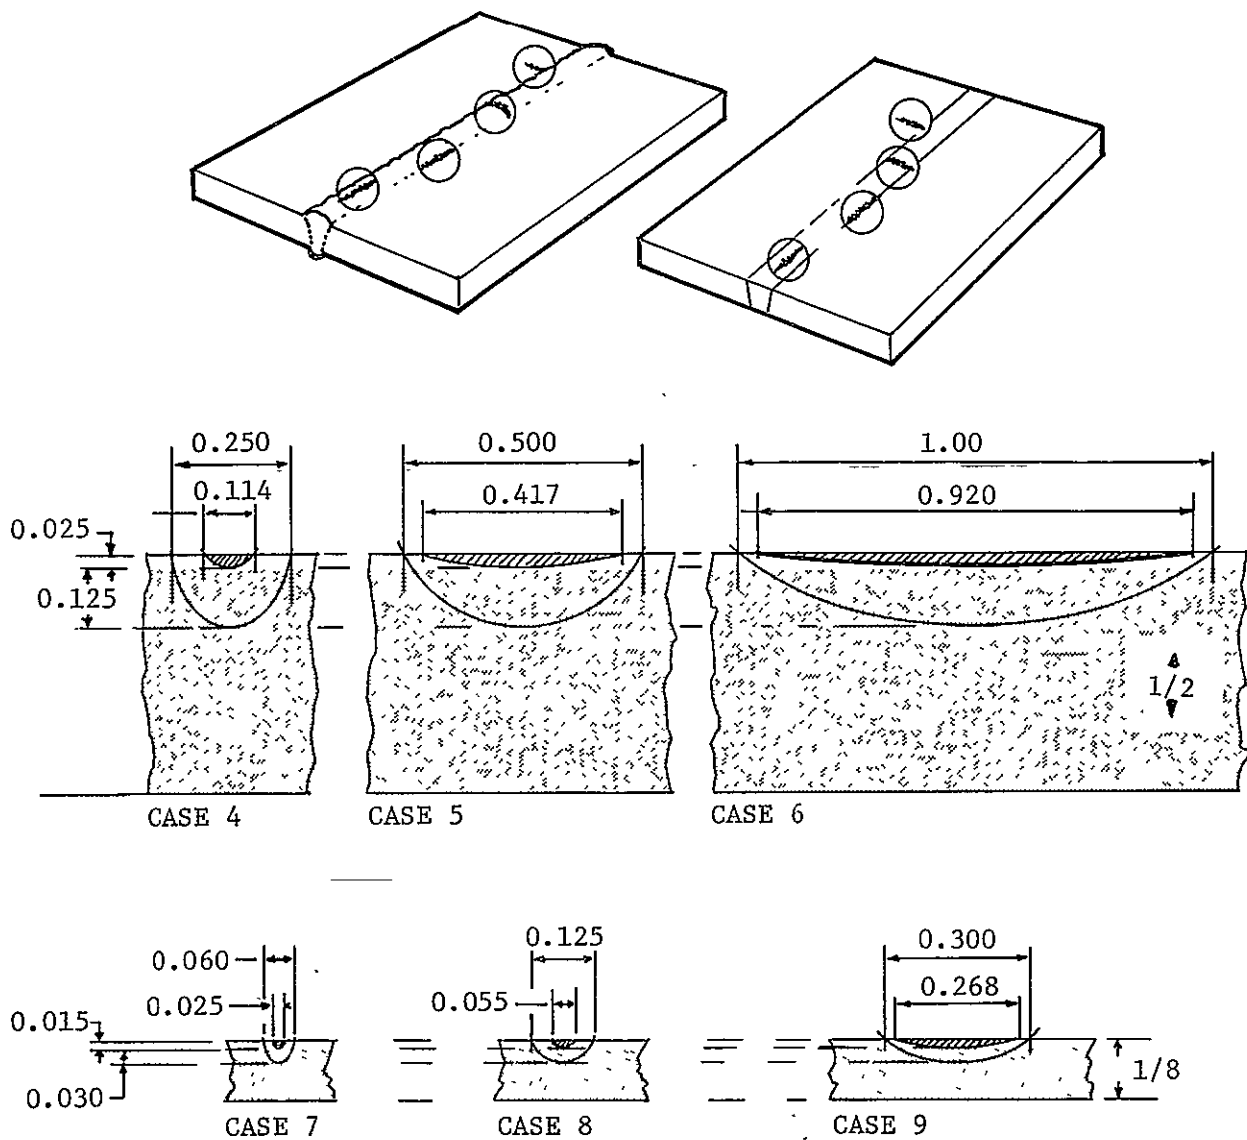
Fatigue-Cracked Weld Panels
